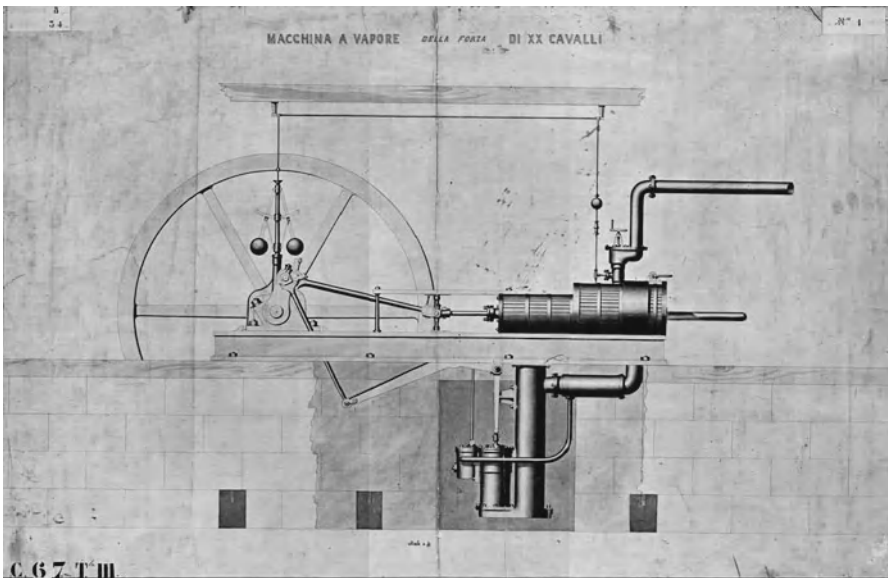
Steam machine with horizontal cylinder by Ansaldo (1856)
